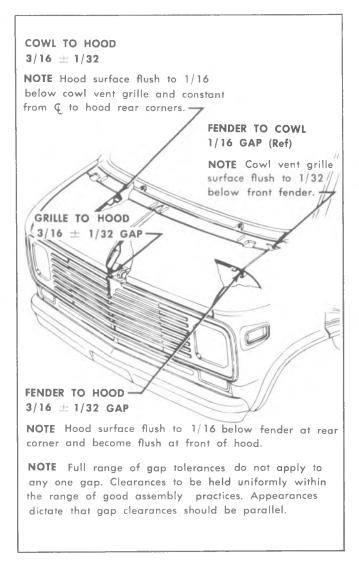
C-18-Front End Sheet Metal Checking—G Series
